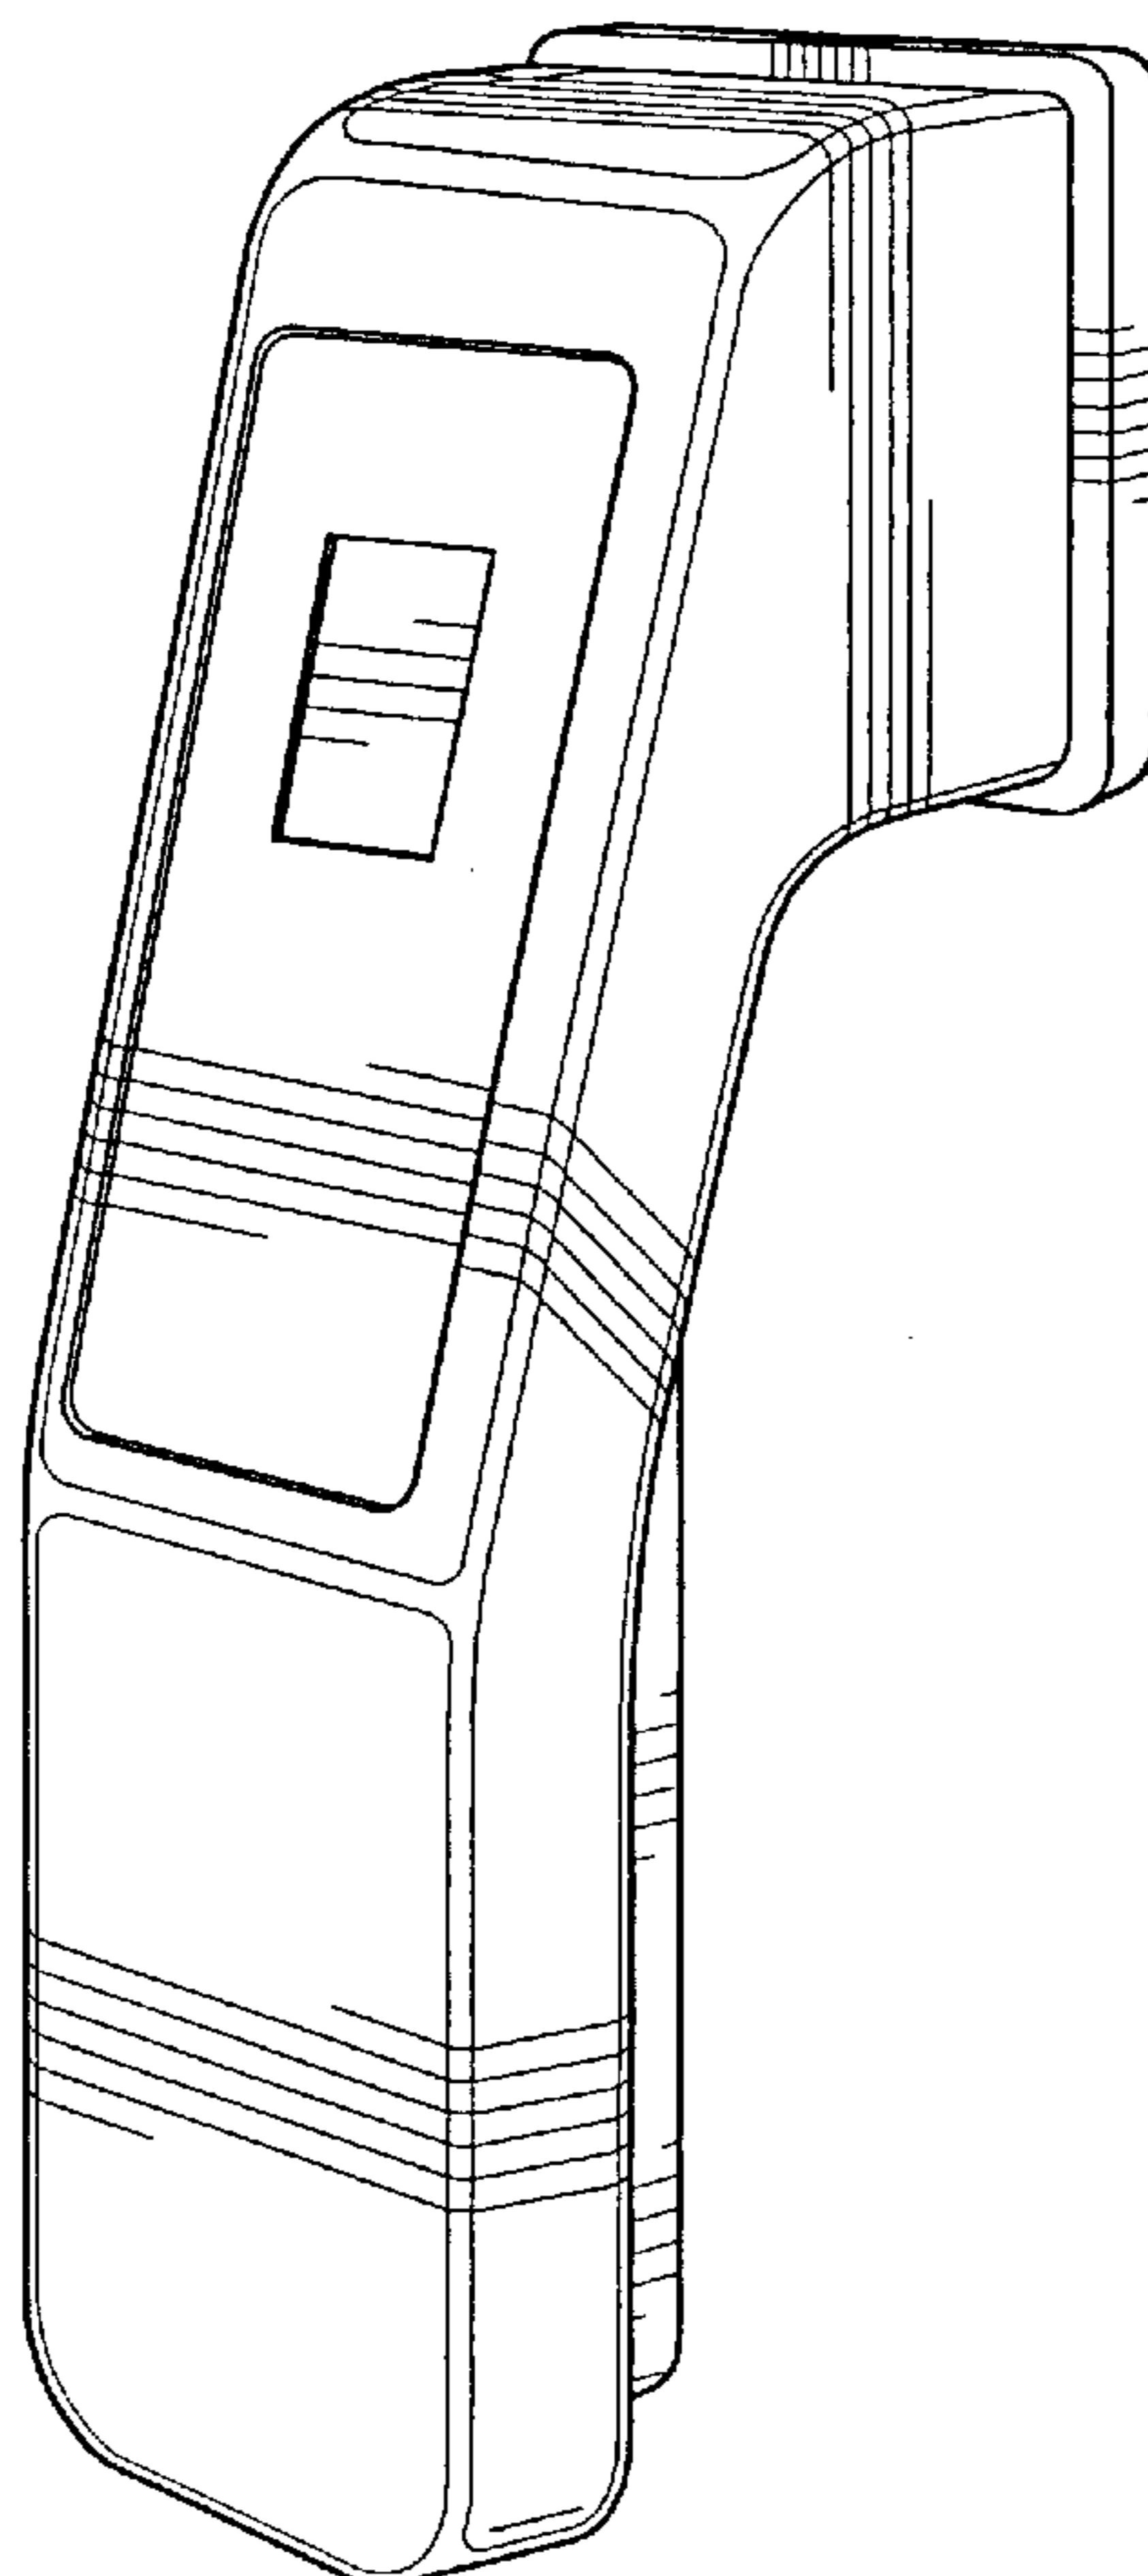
is a perspective view of the thumb print identification safe door handle design;
